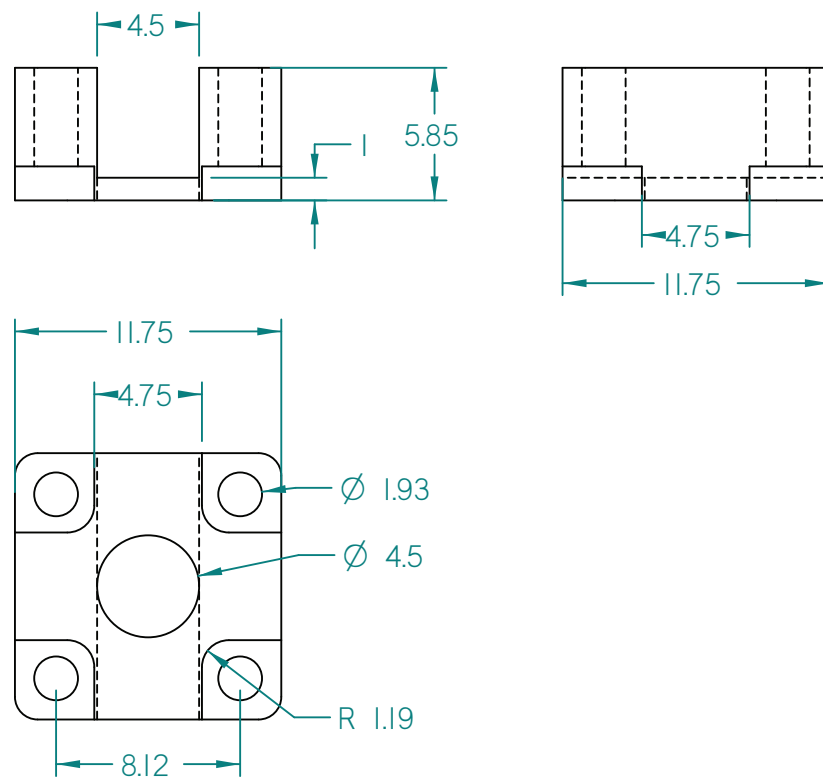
Pickup housing dimensions (mm). Material: Brass. 3:1 scale.
